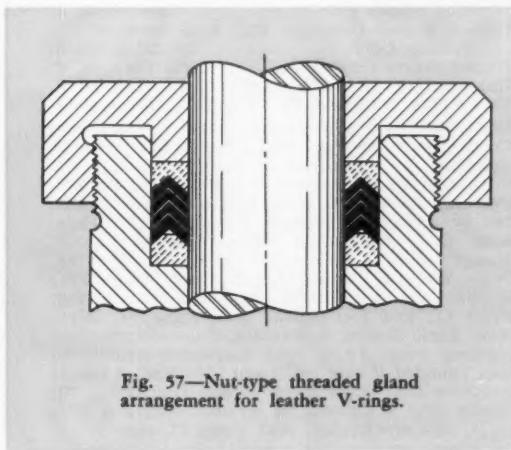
Nut-type threaded gland arrangement for leather V-rings.
